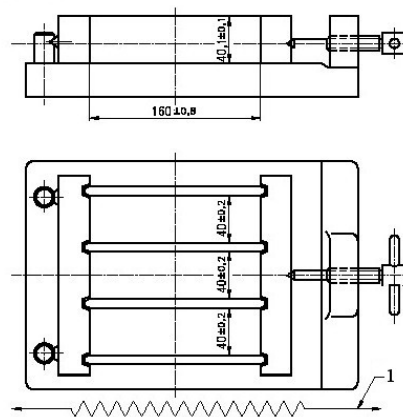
Mold used for the preparation of the specimen and is indicated the (1) metal ruler. Dimension indicated in *mm* [93].
